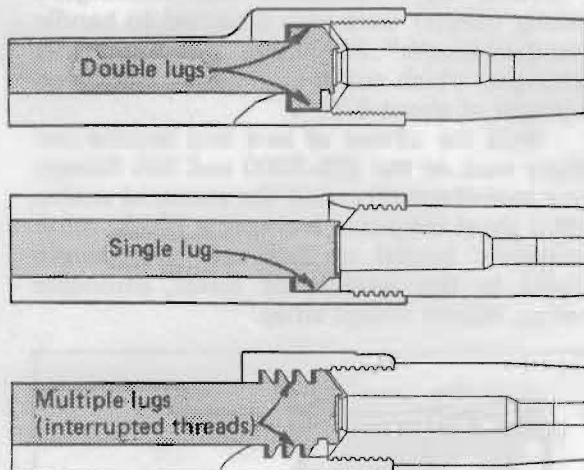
Three types of bolt-action lock-up. The top drawing illustrates the conventional Mauser two-lug lock-up, with the lugs on the bolt engaging recesses in the receiver ring. The middle drawing shows the single-lug lock-up used on the Krag-Jorgenson, some early slide-actions, and other rifles. Support at one side only often changes bullet impact drastically when cartridges different from those used in zeroing are fired. The bottom drawing illustrates the multiple lugs which serve as "threads." When all lugs bear evenly, the action is stronger than the two-lug design.
